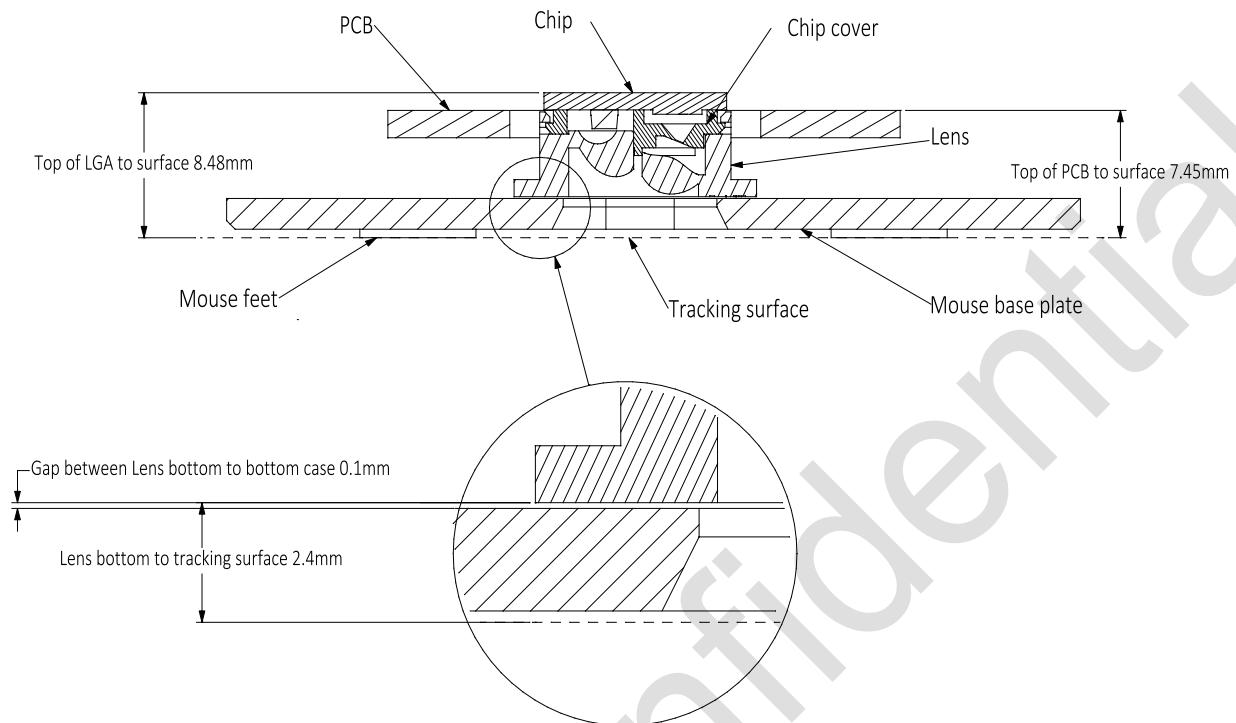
2D Assembly of Chip, Lens, PCB and Base Plate
